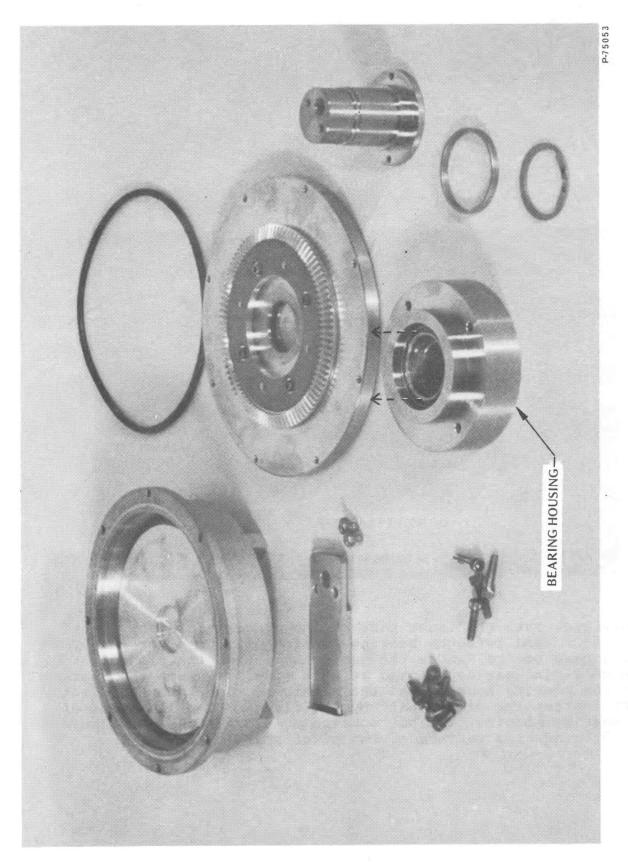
Turn the inner part of the crucible assembly over and lift the bearing housing off the pivot shaft, taking care not to damage the quad-ring inside the flange. (The quad-ring may be removed at this time.) Remove the spacer from the bearing housing and the retaining ring from the pivot shaft. Grasp the pivot shaft by its flange and pull it out of the bearing housing. Do not scratch or score the bearing surface or quad-ring surface of the pivot shaft.
